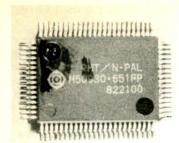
This 80-pin SM i.c. has just been removed from a PCB – with not a hair out of place.
